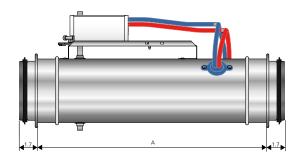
Dimensions with DUCT ADAPTER installed (in), REACT V GMB circular.
